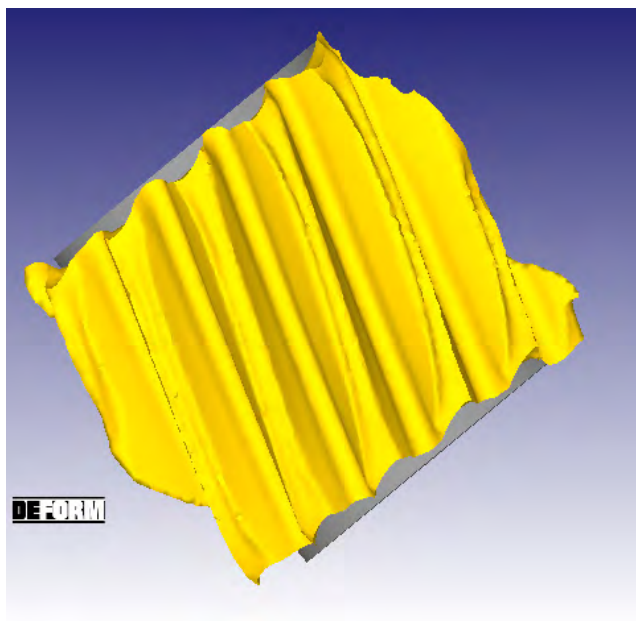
FE simulated gear teeth formed on blank after gear rolling.
